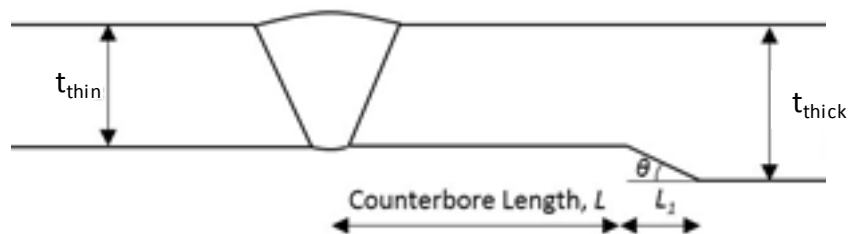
Transition girth weld (counterbore-tapered design)
